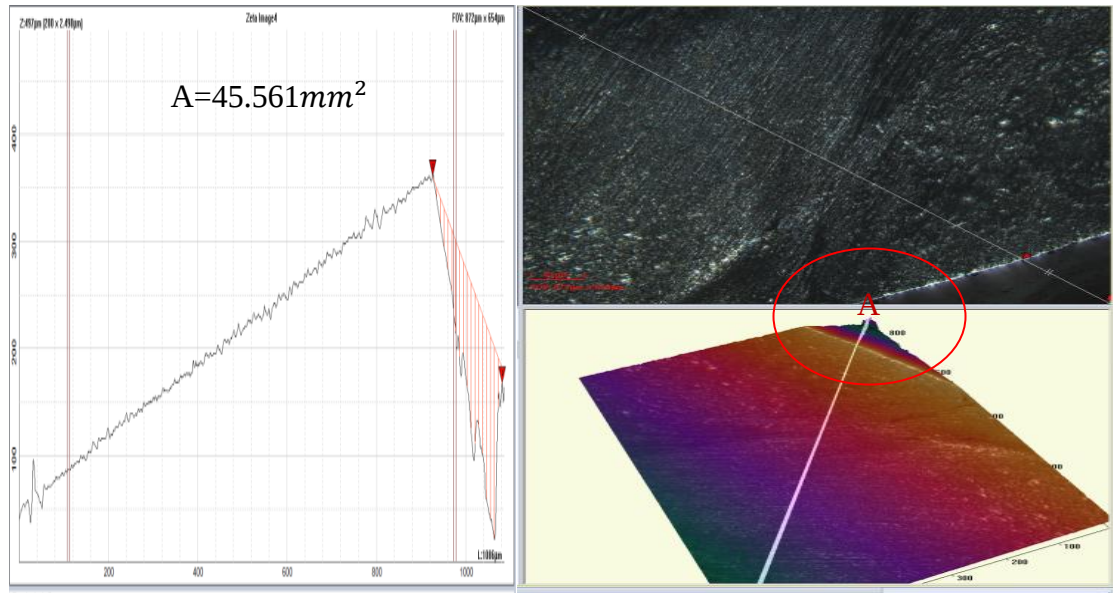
Flank wear of the 1st cutting tool at 20X magnification (0.24 mm/rev feed and 1.25mm depth of cut)
